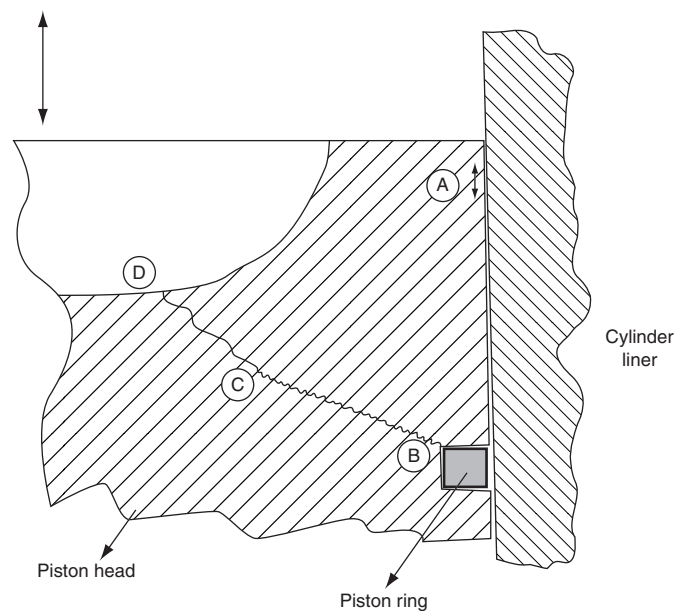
Sketch illustrating piston head misalignment, fatigue crack initiation, and propagation. A, region of misalignment; B, sharp corner of piston ring groove; B-C, fatigue crack; and C-D, sudden overload failure
